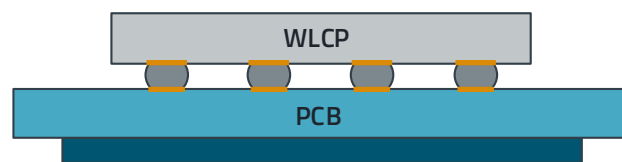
WL CSP mounted on PCB using ~250 μm solder balls for easy prototyping.
